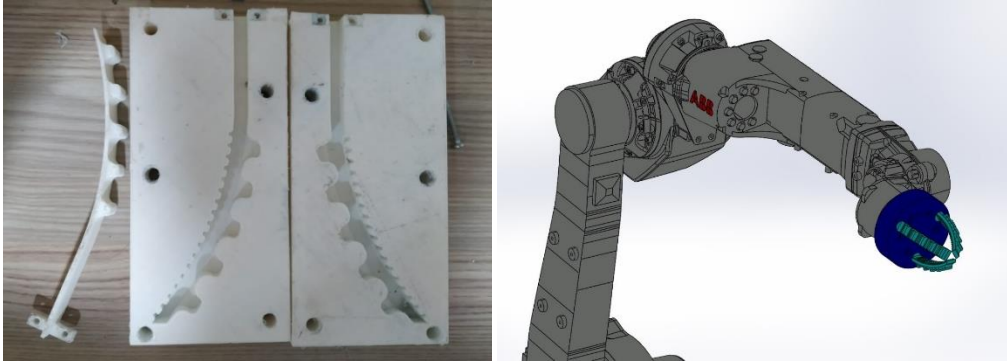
(a) Mold design holder shape and core (b) CAD Model of the Assembled Soft Gripper
